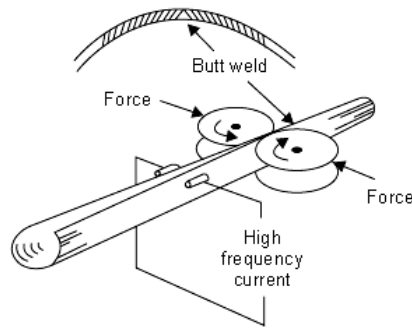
Sketch of high frequency resistance welding
